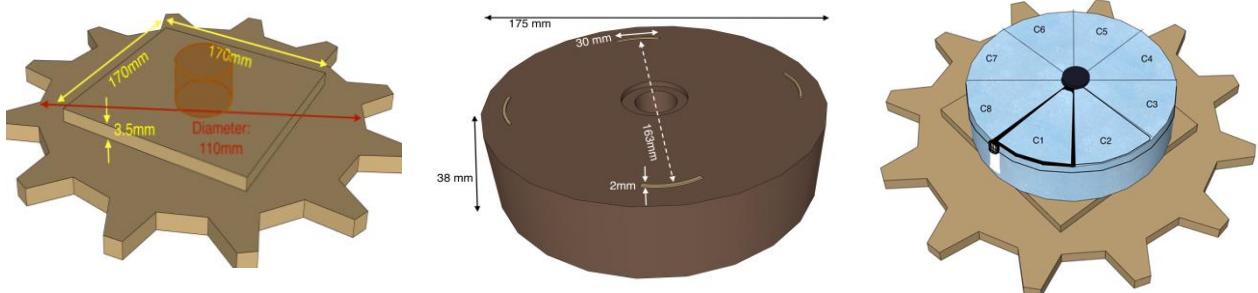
Carousel Design (right: the rotating mechanism; middle: the bottom view of the fasteners box; left: the fasteners box is stuck on top of the square place)
